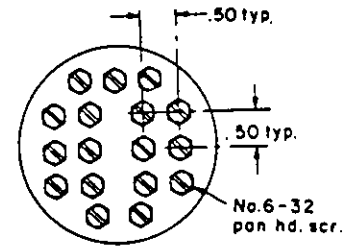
Rear view of control unit showing spacing of screw-type connections.
